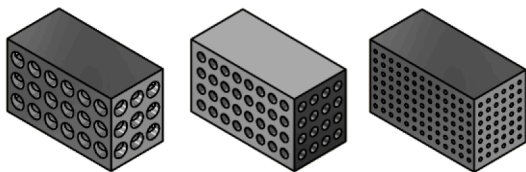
Isometric view of the drilled lattice geometries for the 2.4 mm, 1.4 mm, and 0.6 mm hole layers. The outer dimensions of each sample are 20 mm by 12 mm by 10 mm.
